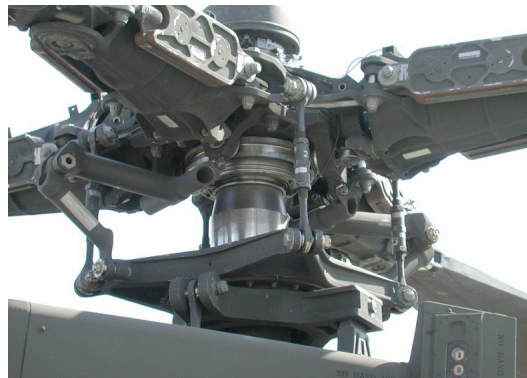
AH-64A Main Rotor Hub Assembly [6]
